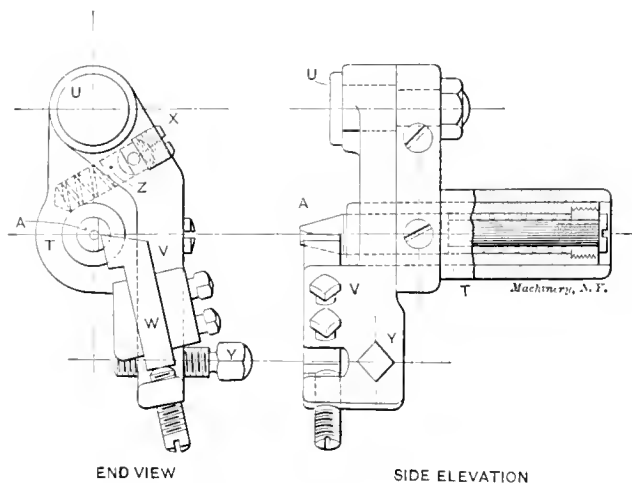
Details of Construction of the Swing Tool shown in Fig. 9.
